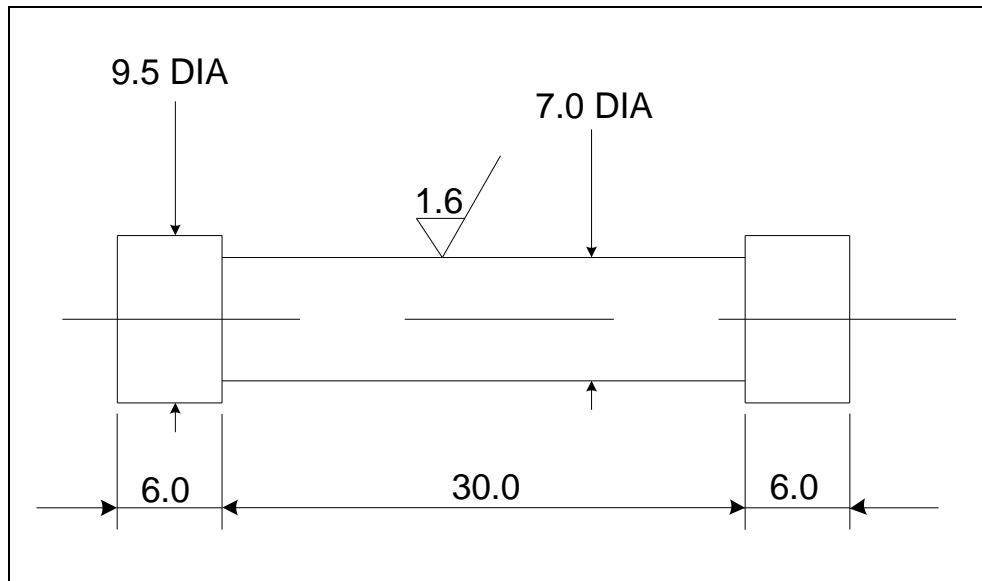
Standard round test-piece for interrupted tensile tests.
